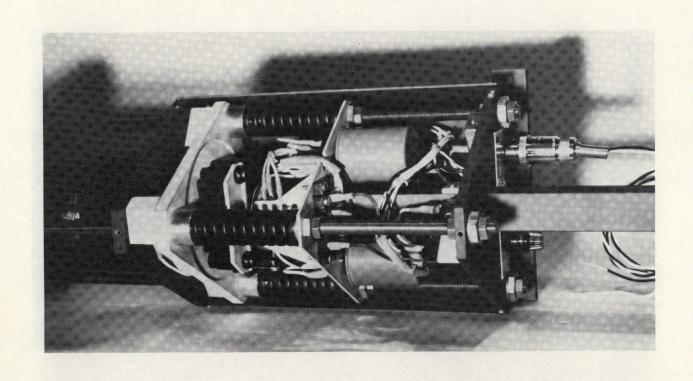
SIDE VIEWS WITH COVER REMOVED
